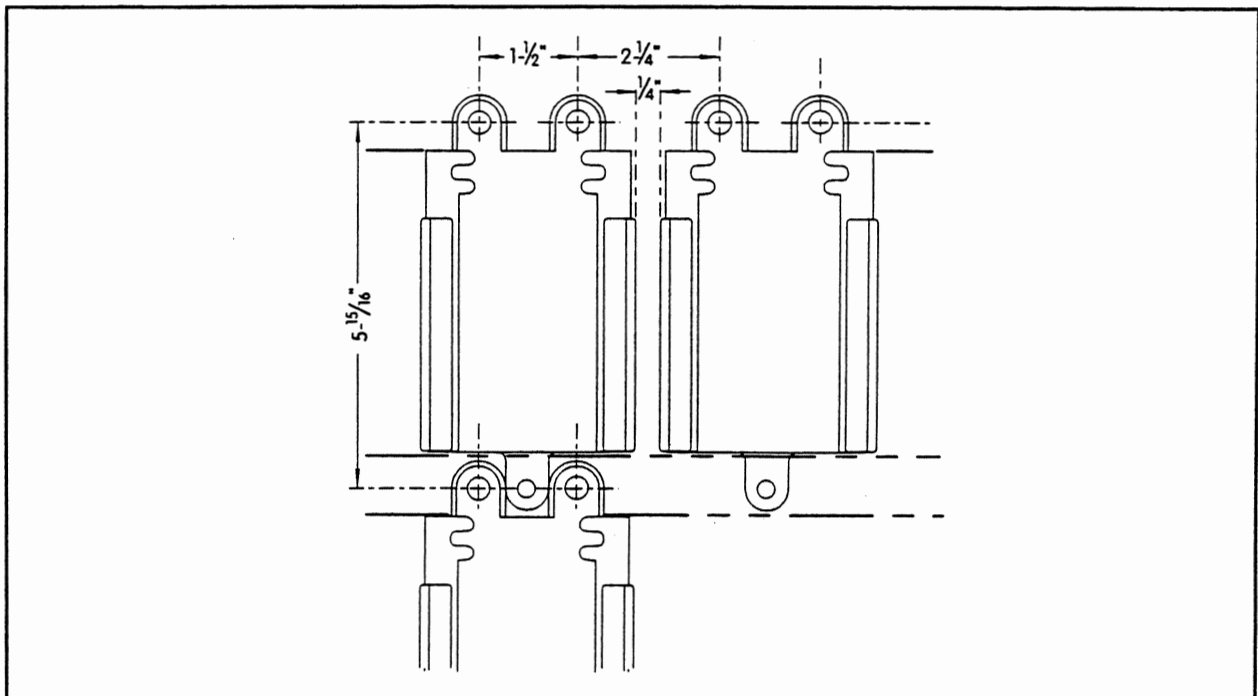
Front Service Plug Coupler, Typical Mounting
